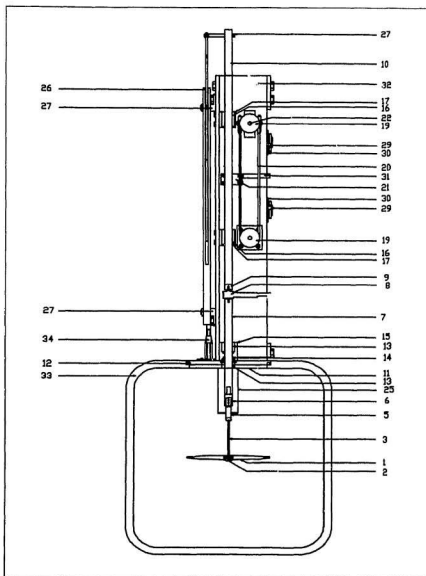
Cross sectional view of the dynamometer. View taken through the aft drive shaft
